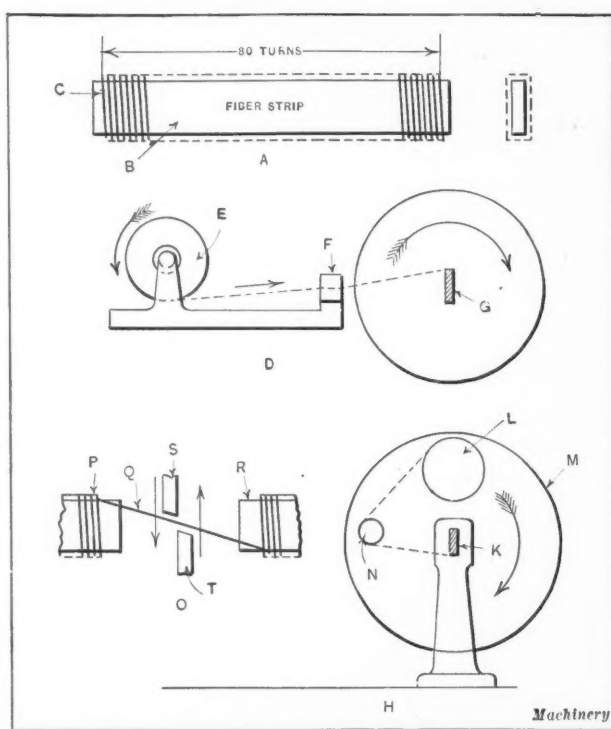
Diagrams showing Principles involved in designing Coil-winding Machine
